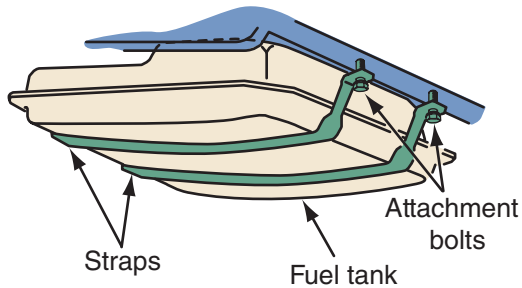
Front and rear fuel tank strap mounting bolts.
